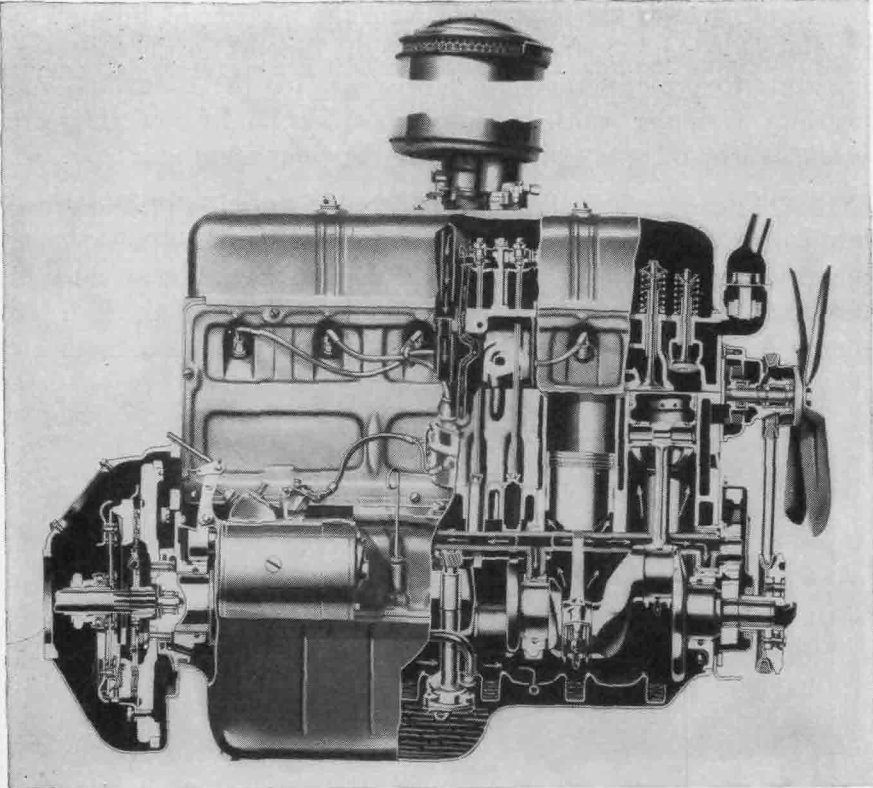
Six-cylinder engine that uses combination splash and pressure-feed lubrication system. (Chevrolet Motor Division of General Motors Corporation)
